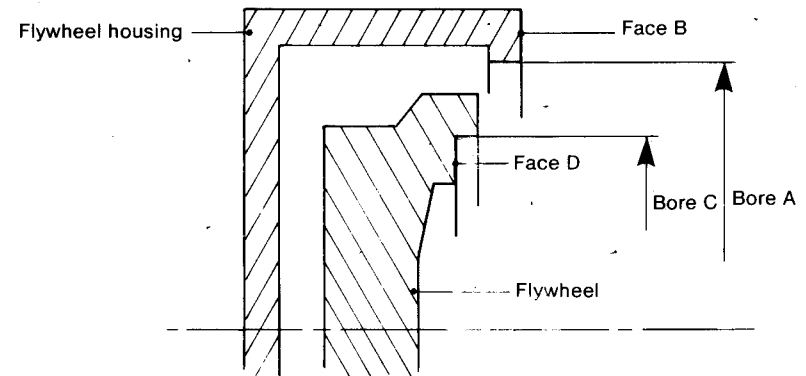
Checking Engine Flywheel and Flywheel Housing
